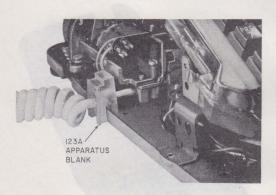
123A Apparatus Blank Installed in 2500D-Type Telephone Set Base
